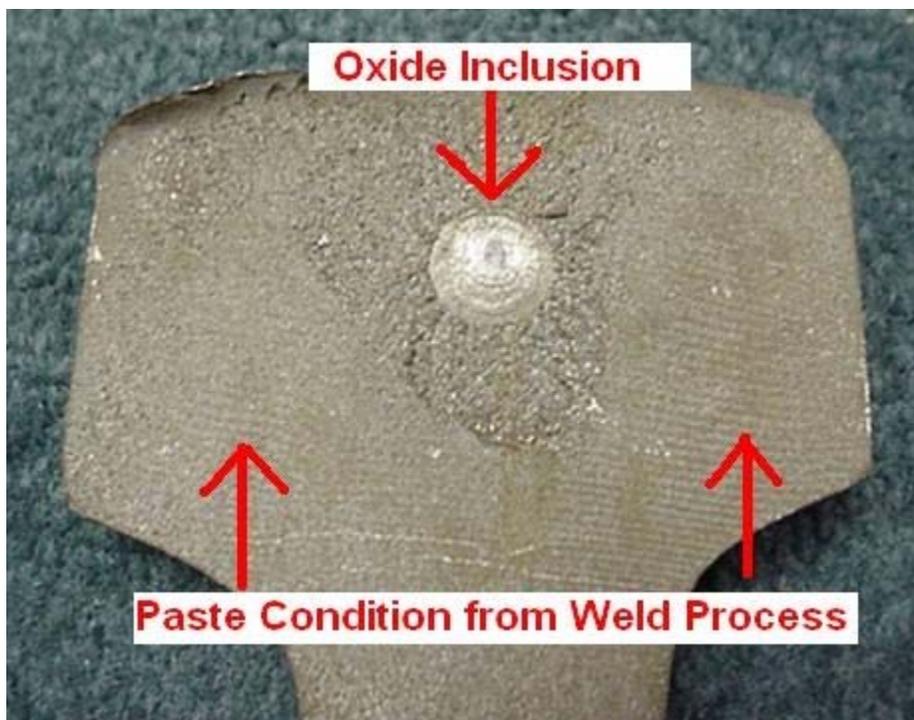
Gas Pressure Weld Showing Oxide Inclusion and Improper Fusion
